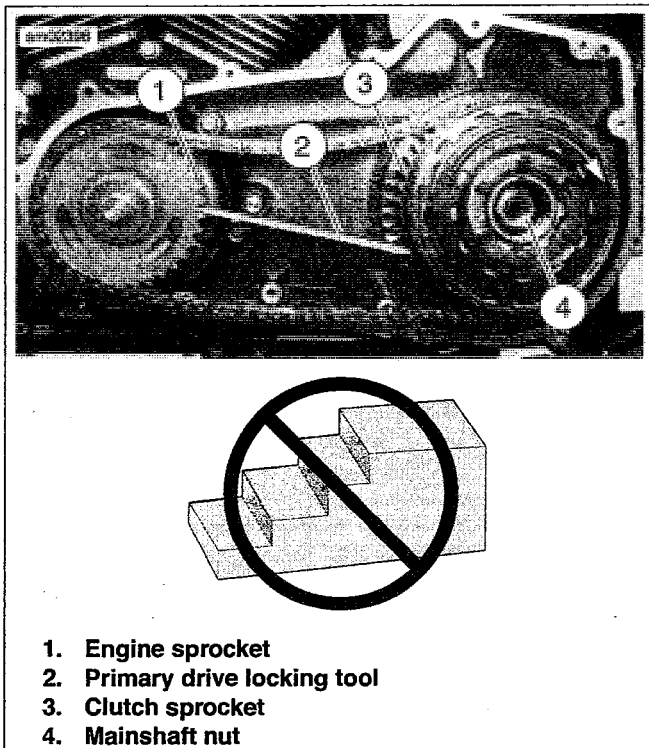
Removing Clutch Hub Mainshaft Nut
